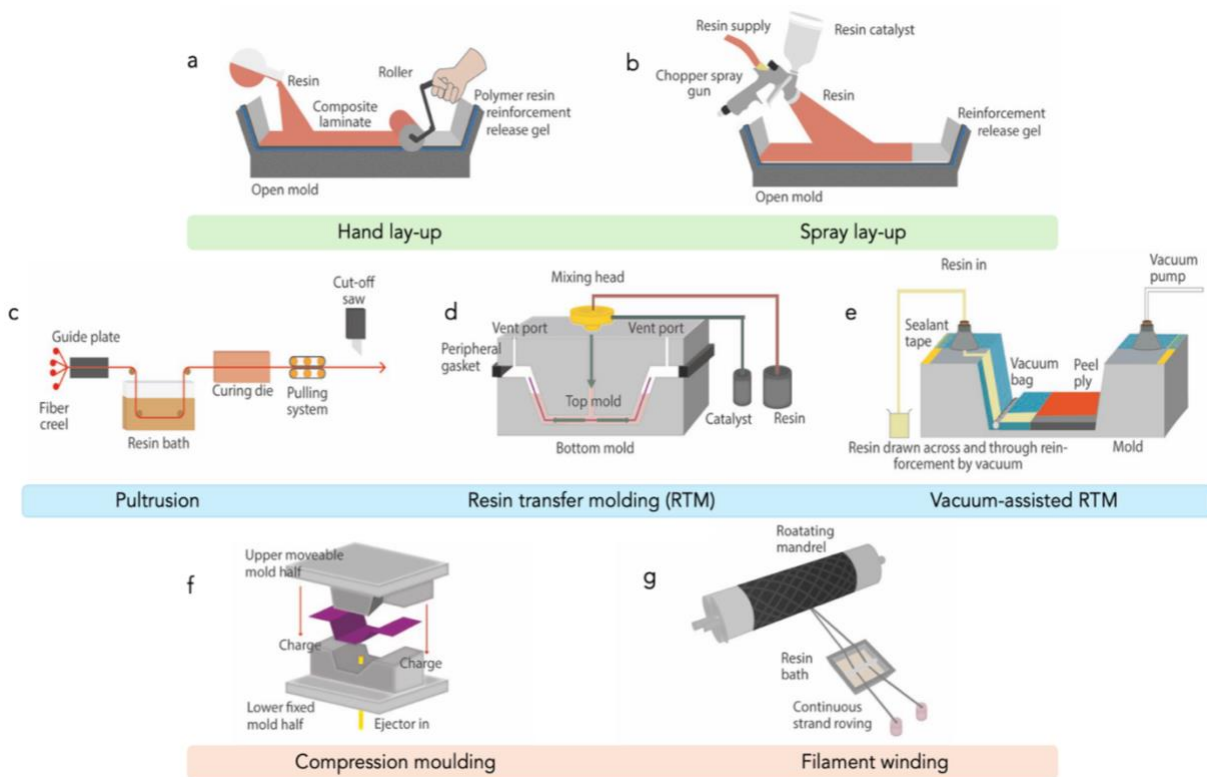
Diagrams of common conventional manufacturing techniques. a) Hand lay-up, b) Spray lay-up, c) Pultrusion, d) Resin transfer moulding (RTM), e) Vacuum-assisted RTM, f) Compression moulding, g) Filament winding. Image edited and rearranged from⁴.
